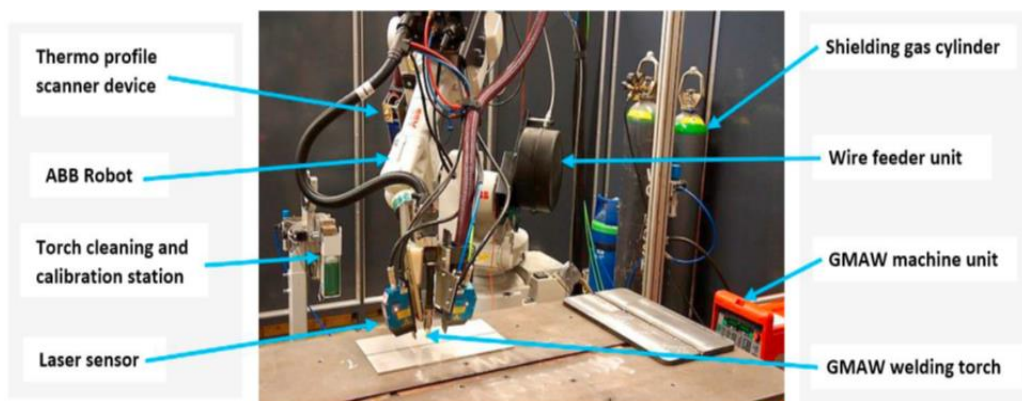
Automatic Welding GMAW equipment (Gyasi et al., 2019)
